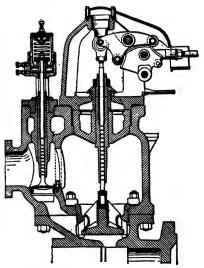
Sectional view showing valve gear of the Nordberg unaflow engine.
